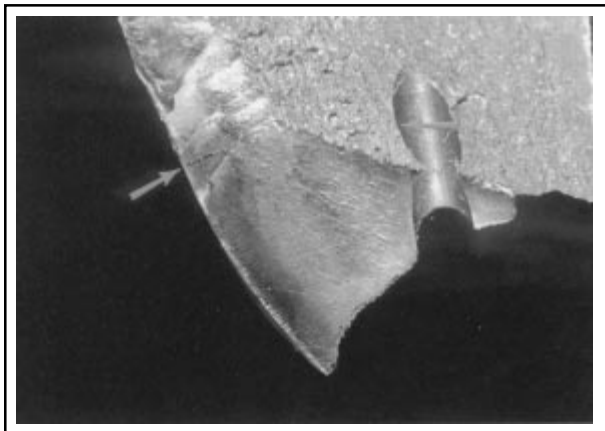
Fatigue crack that intersected the woody fracture
